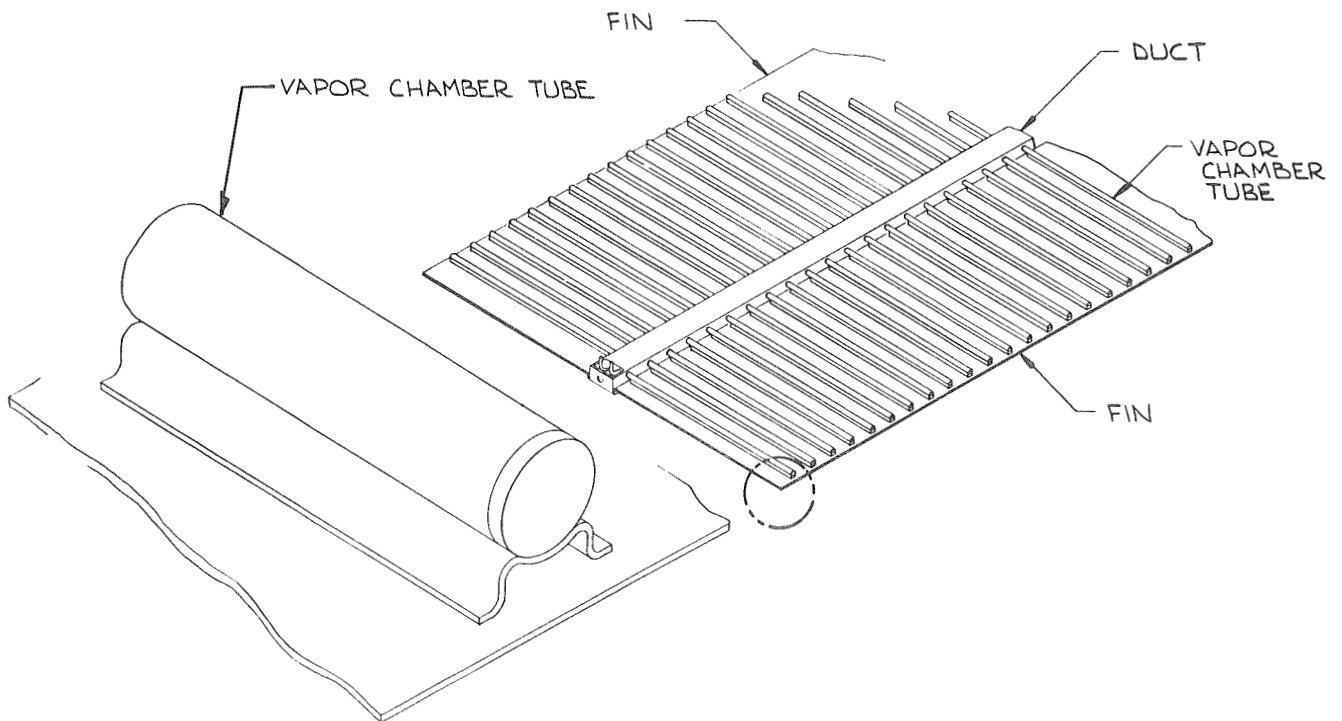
Vapor Chamber Fin Radiator Assembly Sequence Step 6
